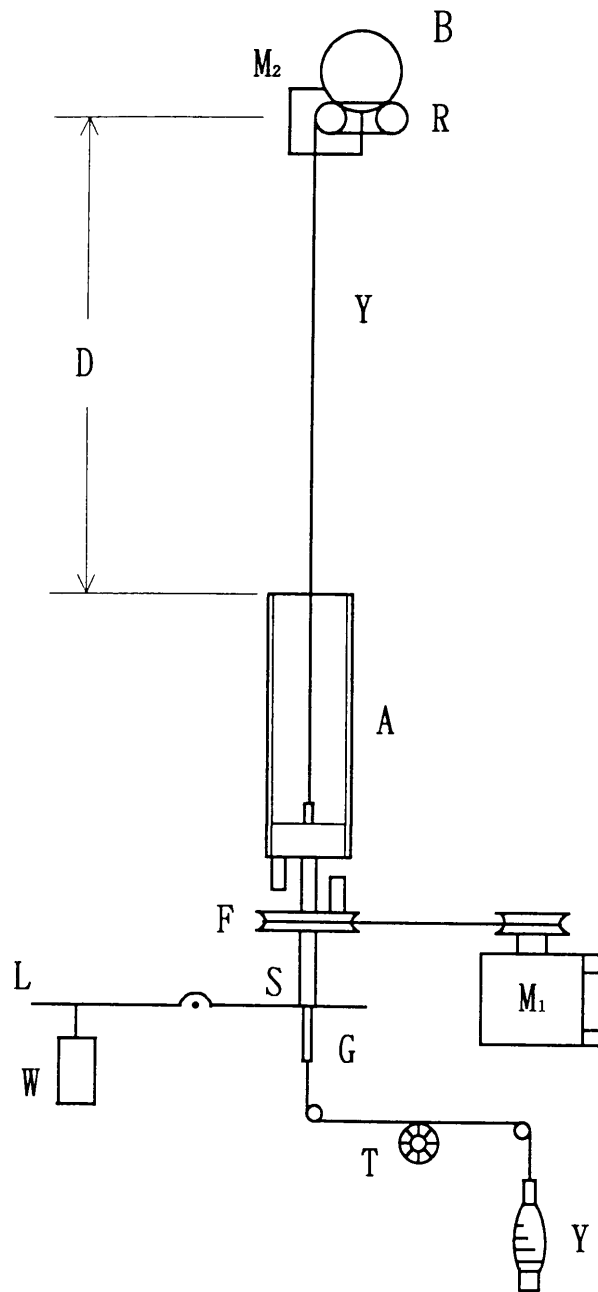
Improved throstle-spinning machine for core-spun yarn (A: stuffer tube; B: bobbin; D: ratch; F: pulley; G: guide pipe; L: lever; M_1 , M_2 : motors; R: take-up roller; S: hollow spindle; T: tension disc; W: load; Y: continuous-filament core yarn).
